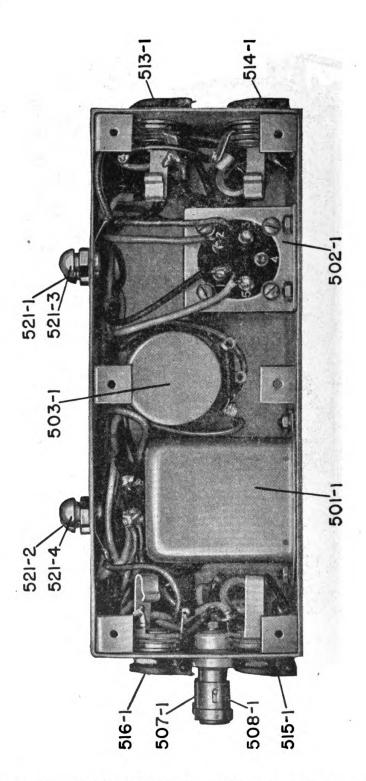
Control Unit RM-35-B, bottom view showing wiring.
